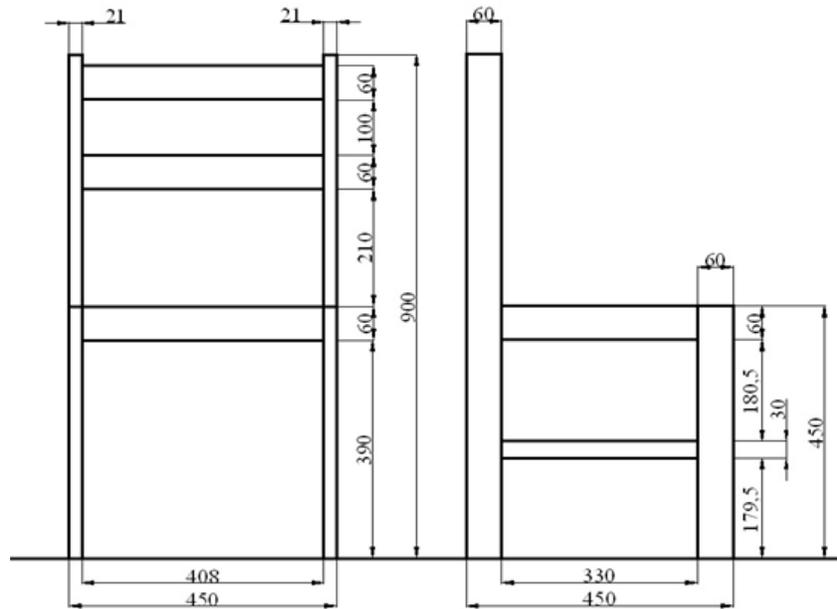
Dimensions of the chair used in the tests (measurements in mm)
